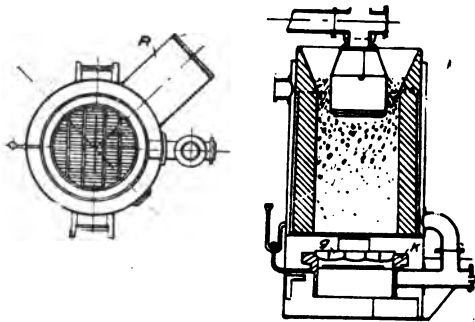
Sectional View of the Crossley Type "A" Pressure Producer.
